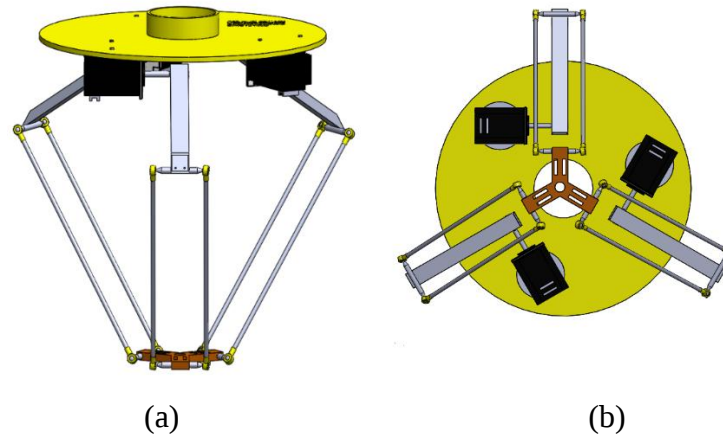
1: CAD-model of the manipulator (a) Front view (b) Bottom view.
